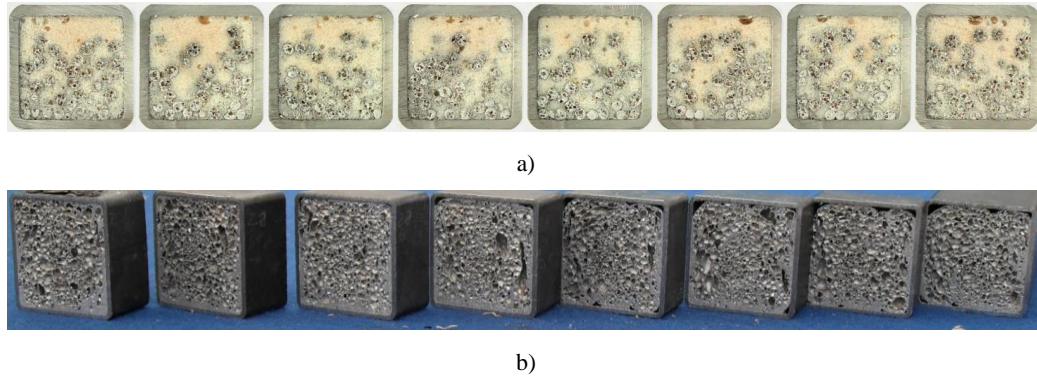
a) Hybrid APM foam filled tube cross sections, b) Aluminum foam filled tube cross sections.
